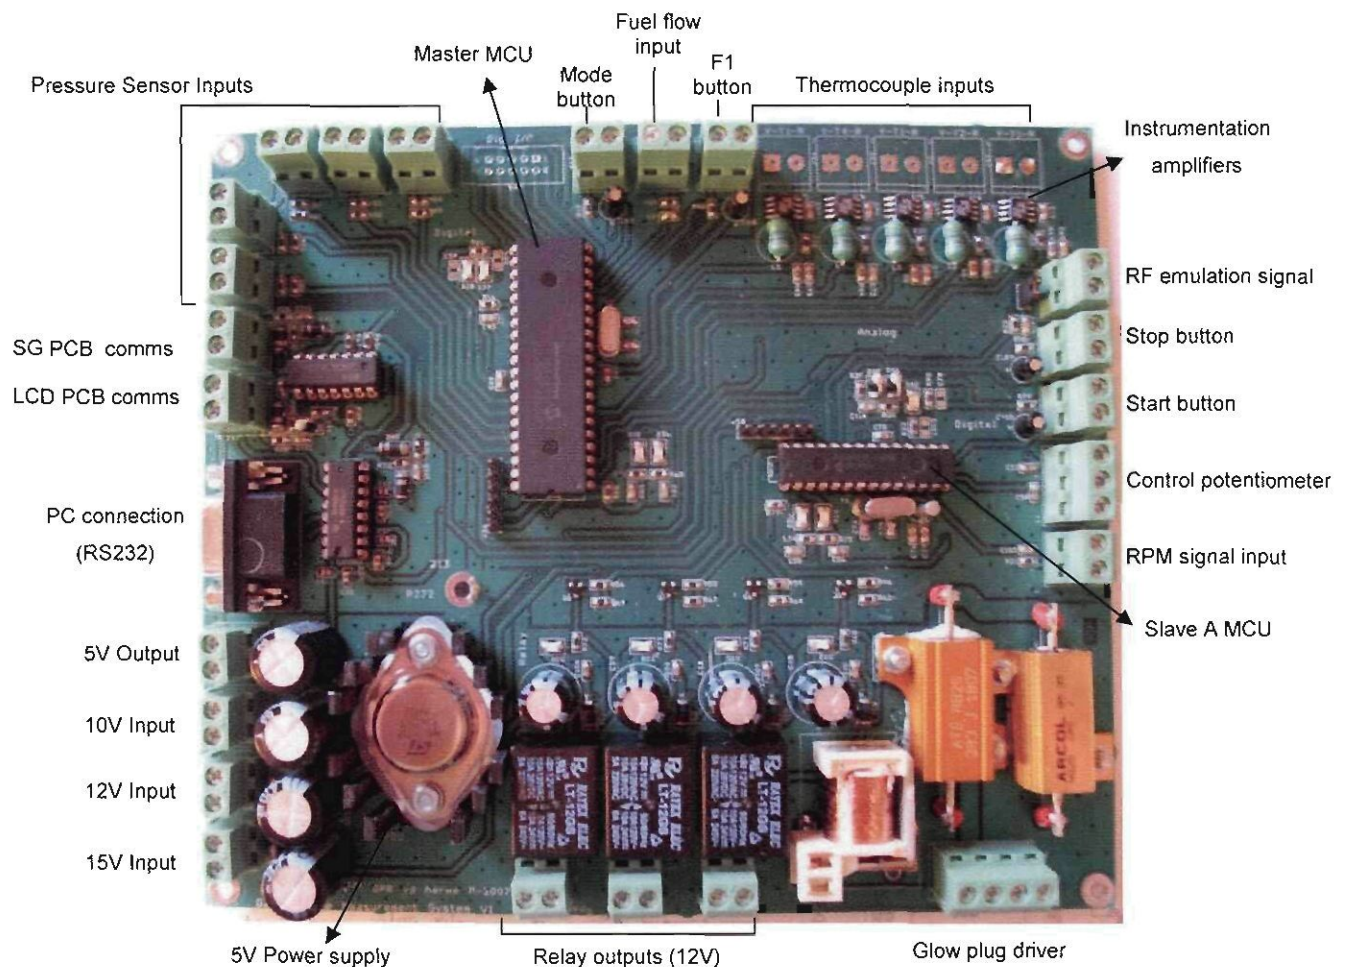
The Electronic Control Unit PCB Circuit
